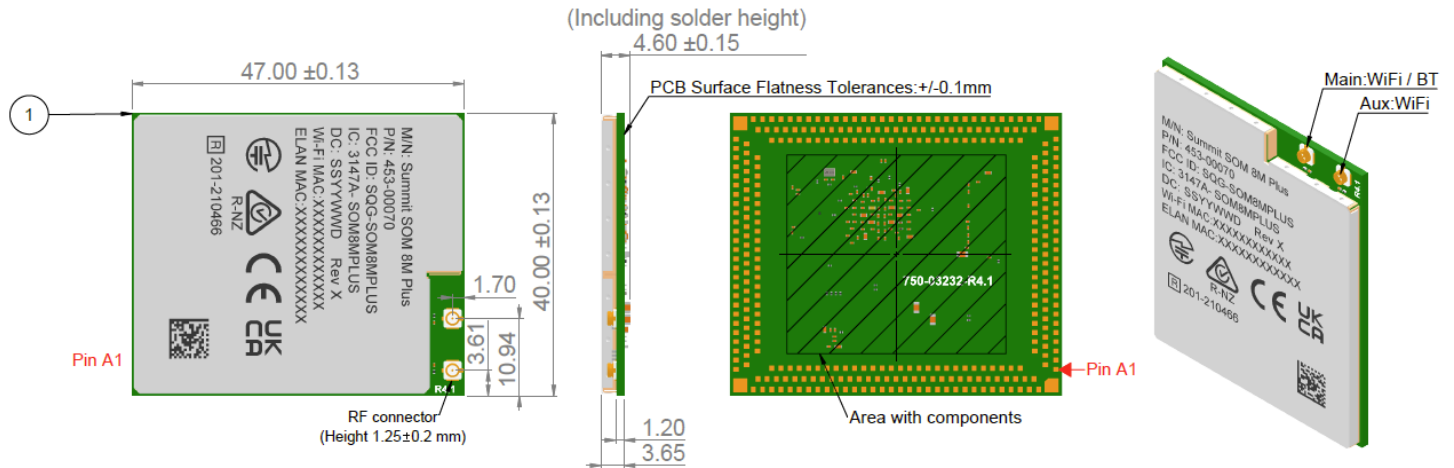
Mechanical drawing – Summit SOM 8M Plus module
